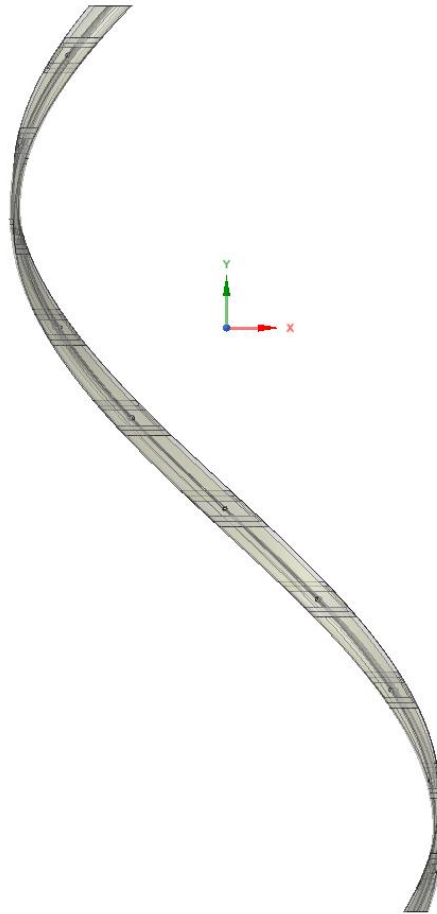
Optimised 11 Blades Assembly with Trimmed End Sections
